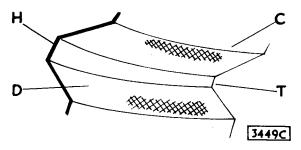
Low tooth contact. Keys to Figs. 41, 42 and 43.
